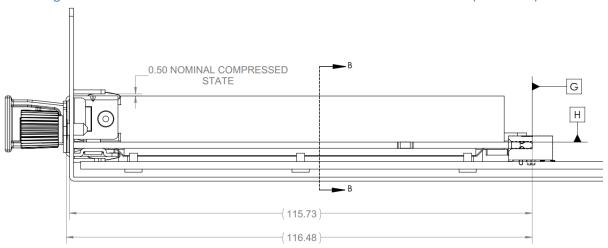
SFF Baseboard Chassis CTF Dimensions (Rear View)
